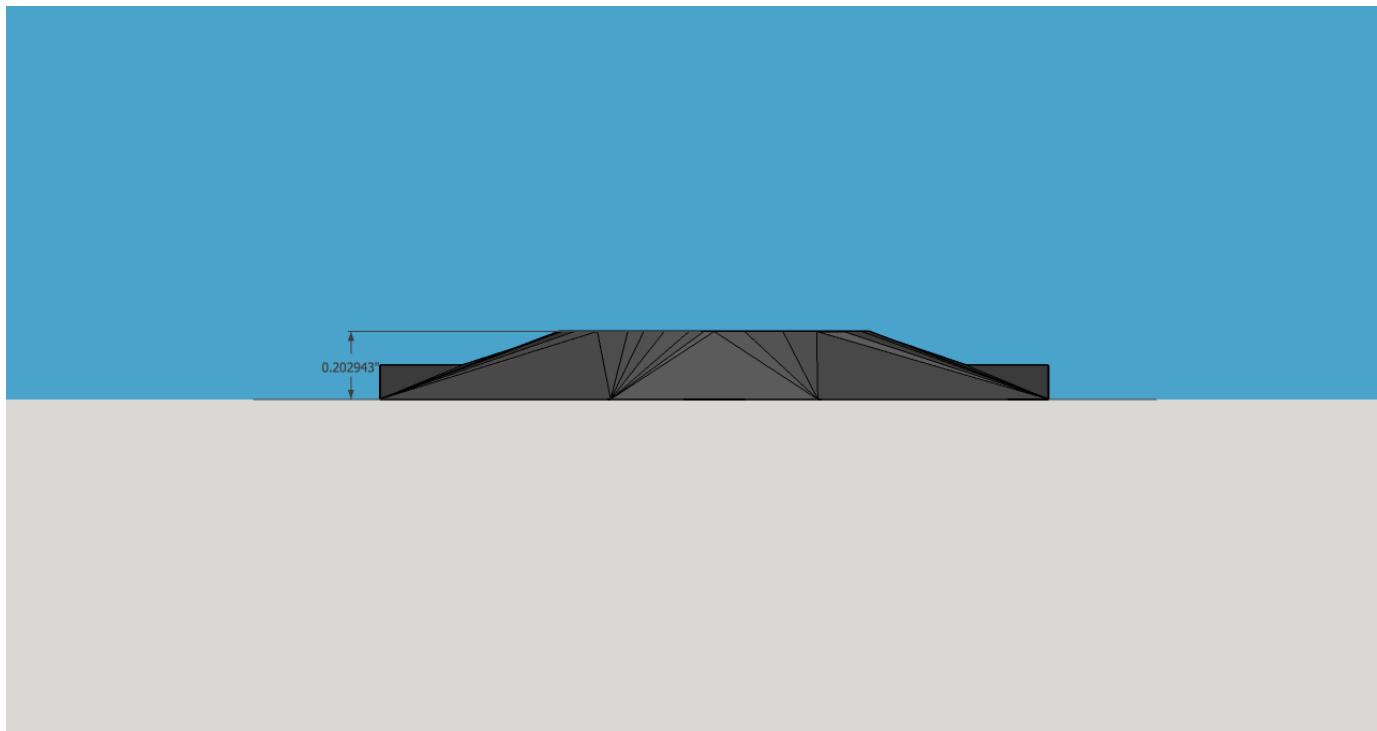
The front cross section view and measurements of the sFPI aluminum base
